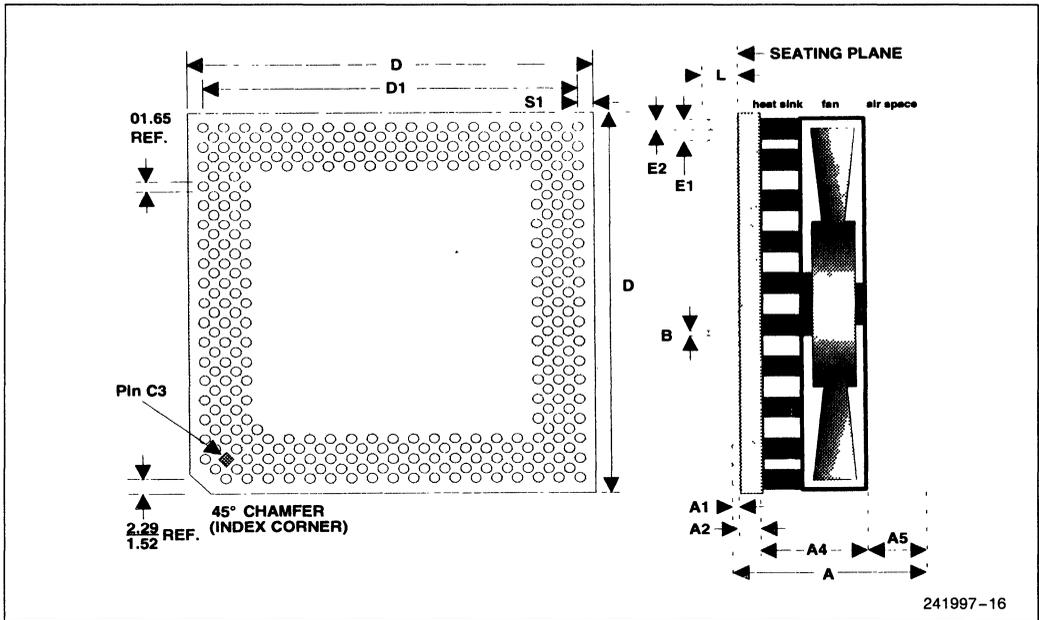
Future Pentium® OverDrive® Processor Package Dimensions
